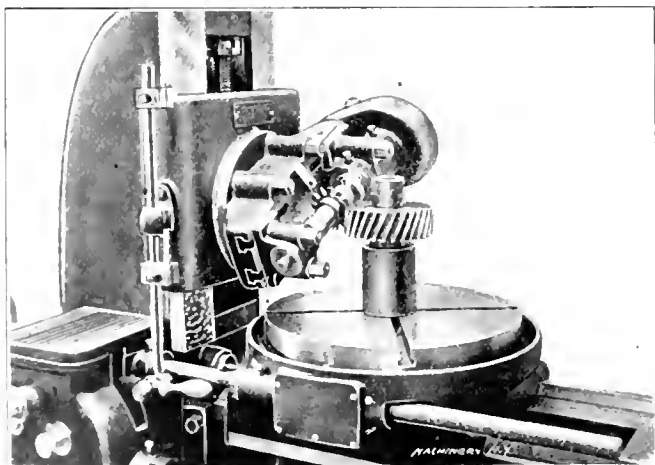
The Gildemeister Machine cutting a Spiral Gear by the Formed Tool Process.
